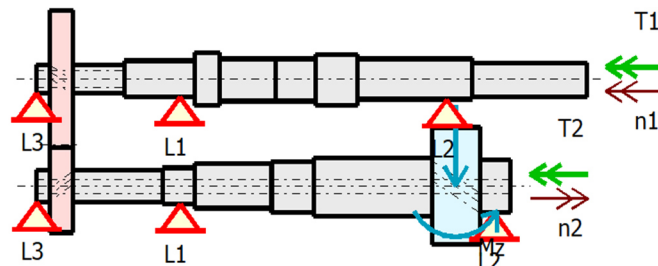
Internal gearbox arrangement including bearings and tested gearset loading
